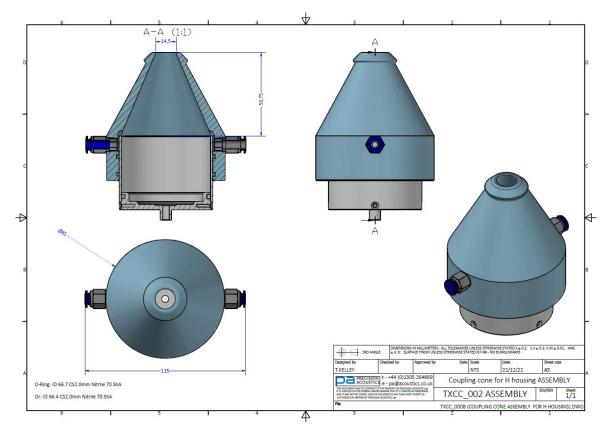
Coupling cone assembly (incl. transducer) for TXH-1-75 and TXH-0.67-75
